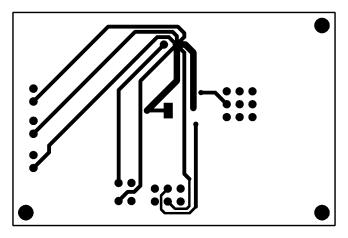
Recommended NHK PCB Layout: Bottom Layer
